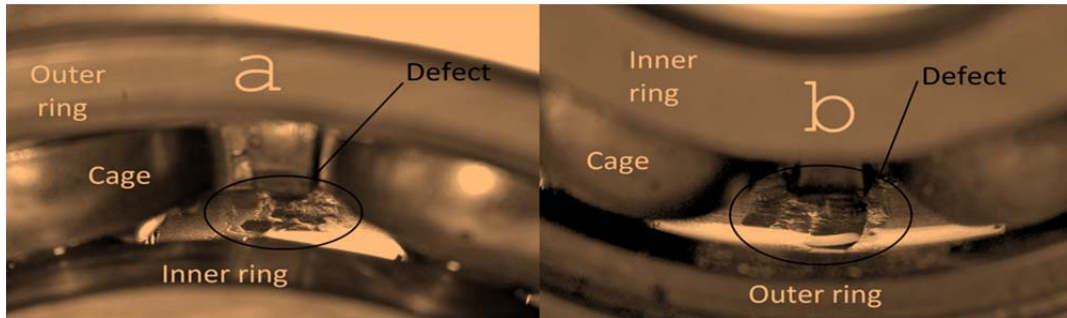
Defects of the deep groove ball bearing 6204 2Z/C3 P6: a - inner ring race defect; b - outer ring race defect
